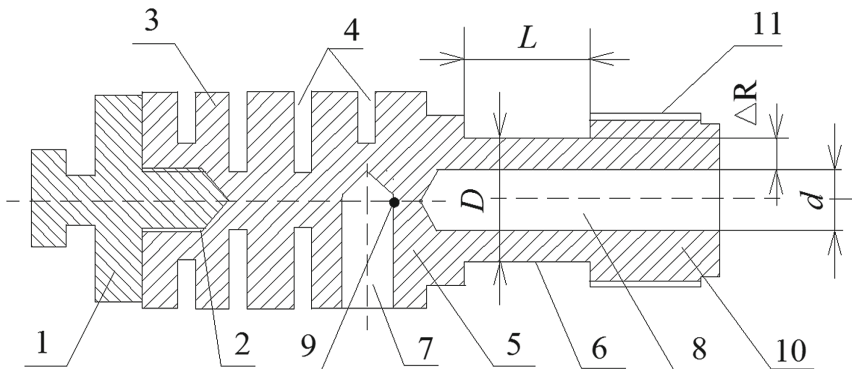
An experimental device with a measuring element for determining the effort to extract the billet from the mold HCCMB: 1 - cold billet head; 2 - threaded connection; 3 - temperature compensator; 4 - annular thermal resistance; 5 - measuring element; 6 - the base surface of the measuring element for the installation of strain gauges; 7 8, - technological holes; 9 - thermocouple for monitoring the temperature of the measuring element; 10 - sleeve for connecting to the shank; 11 - threaded connection for attaching a shank cold head billet (not shown); L - is the length of the base of the measuring element; D , d - outer and inner diameters of the annular section of the base for calculating its cross-section; ΔR is the difference in the size of the outer and inner radii.
